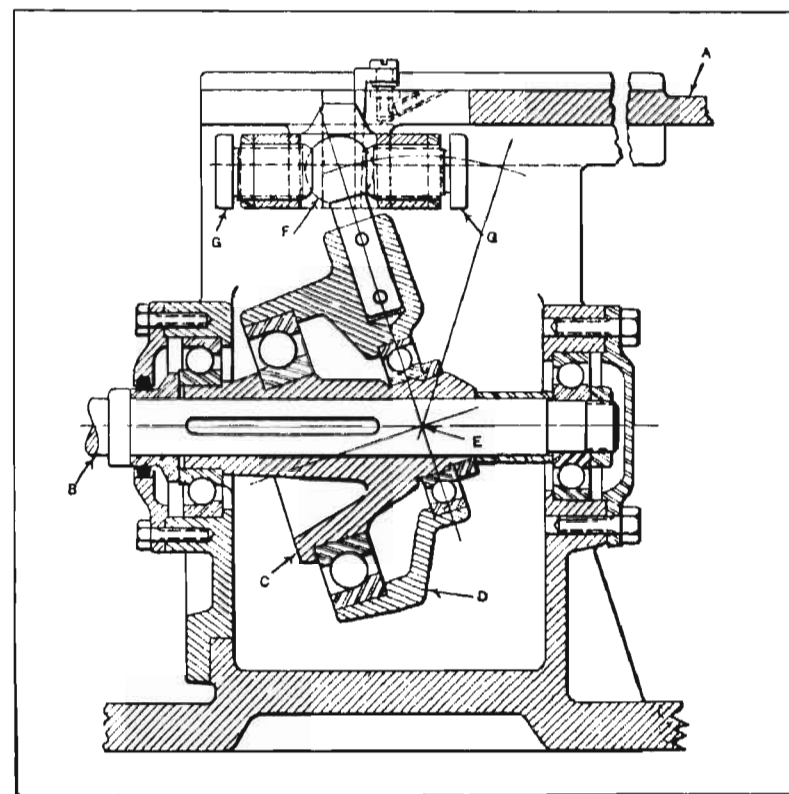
Reciprocating Mechanism of a High-speed Machine for Operating Slide Parallel to Driving Shaft
